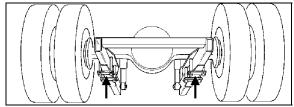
JACKING POINTS ON DRIVE AXLE 11005
